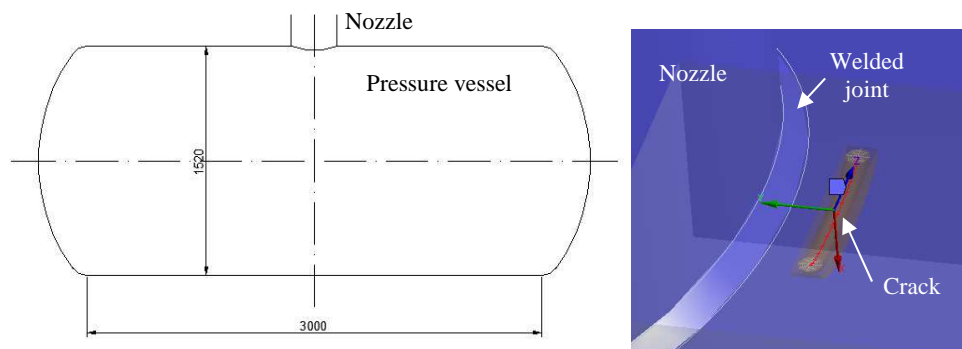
Geometry of pressure vessel and detail of crack position in vicinity of welded joint
